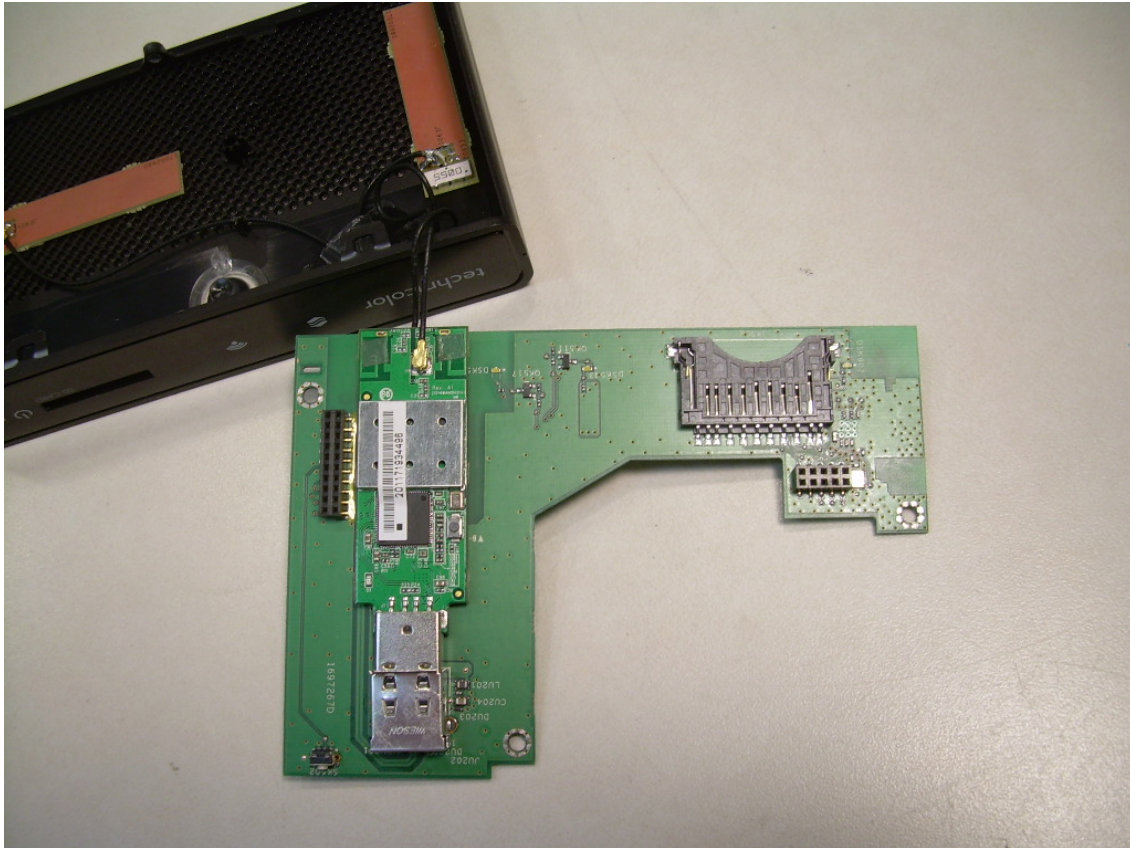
Top View of the Main PCB with RF Absorber Removed
